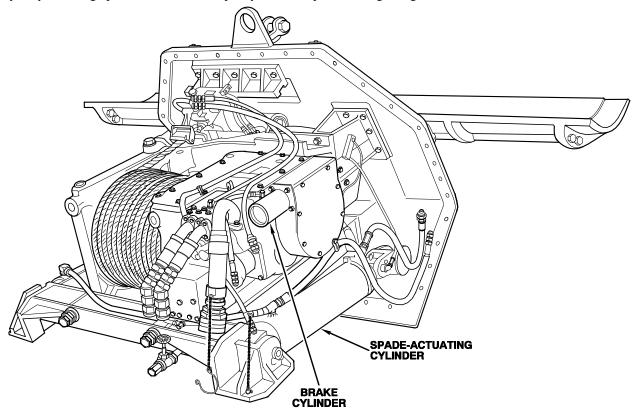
Main Winch and Spade Assembly—Right-Rear View.
